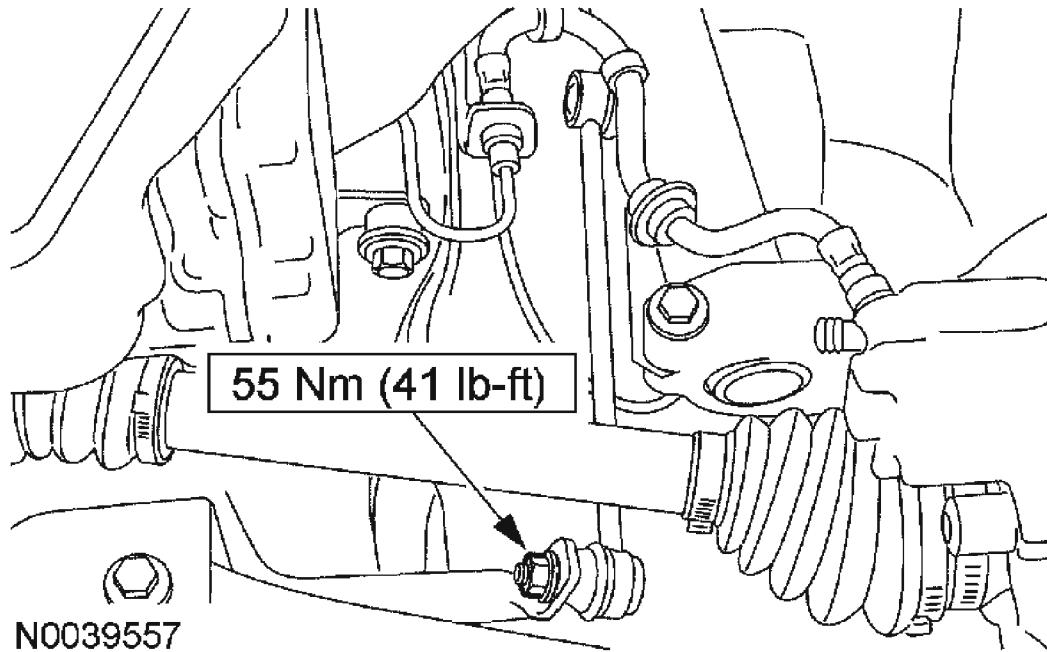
Installing Support Insulator To Transaxle Center Bolt
